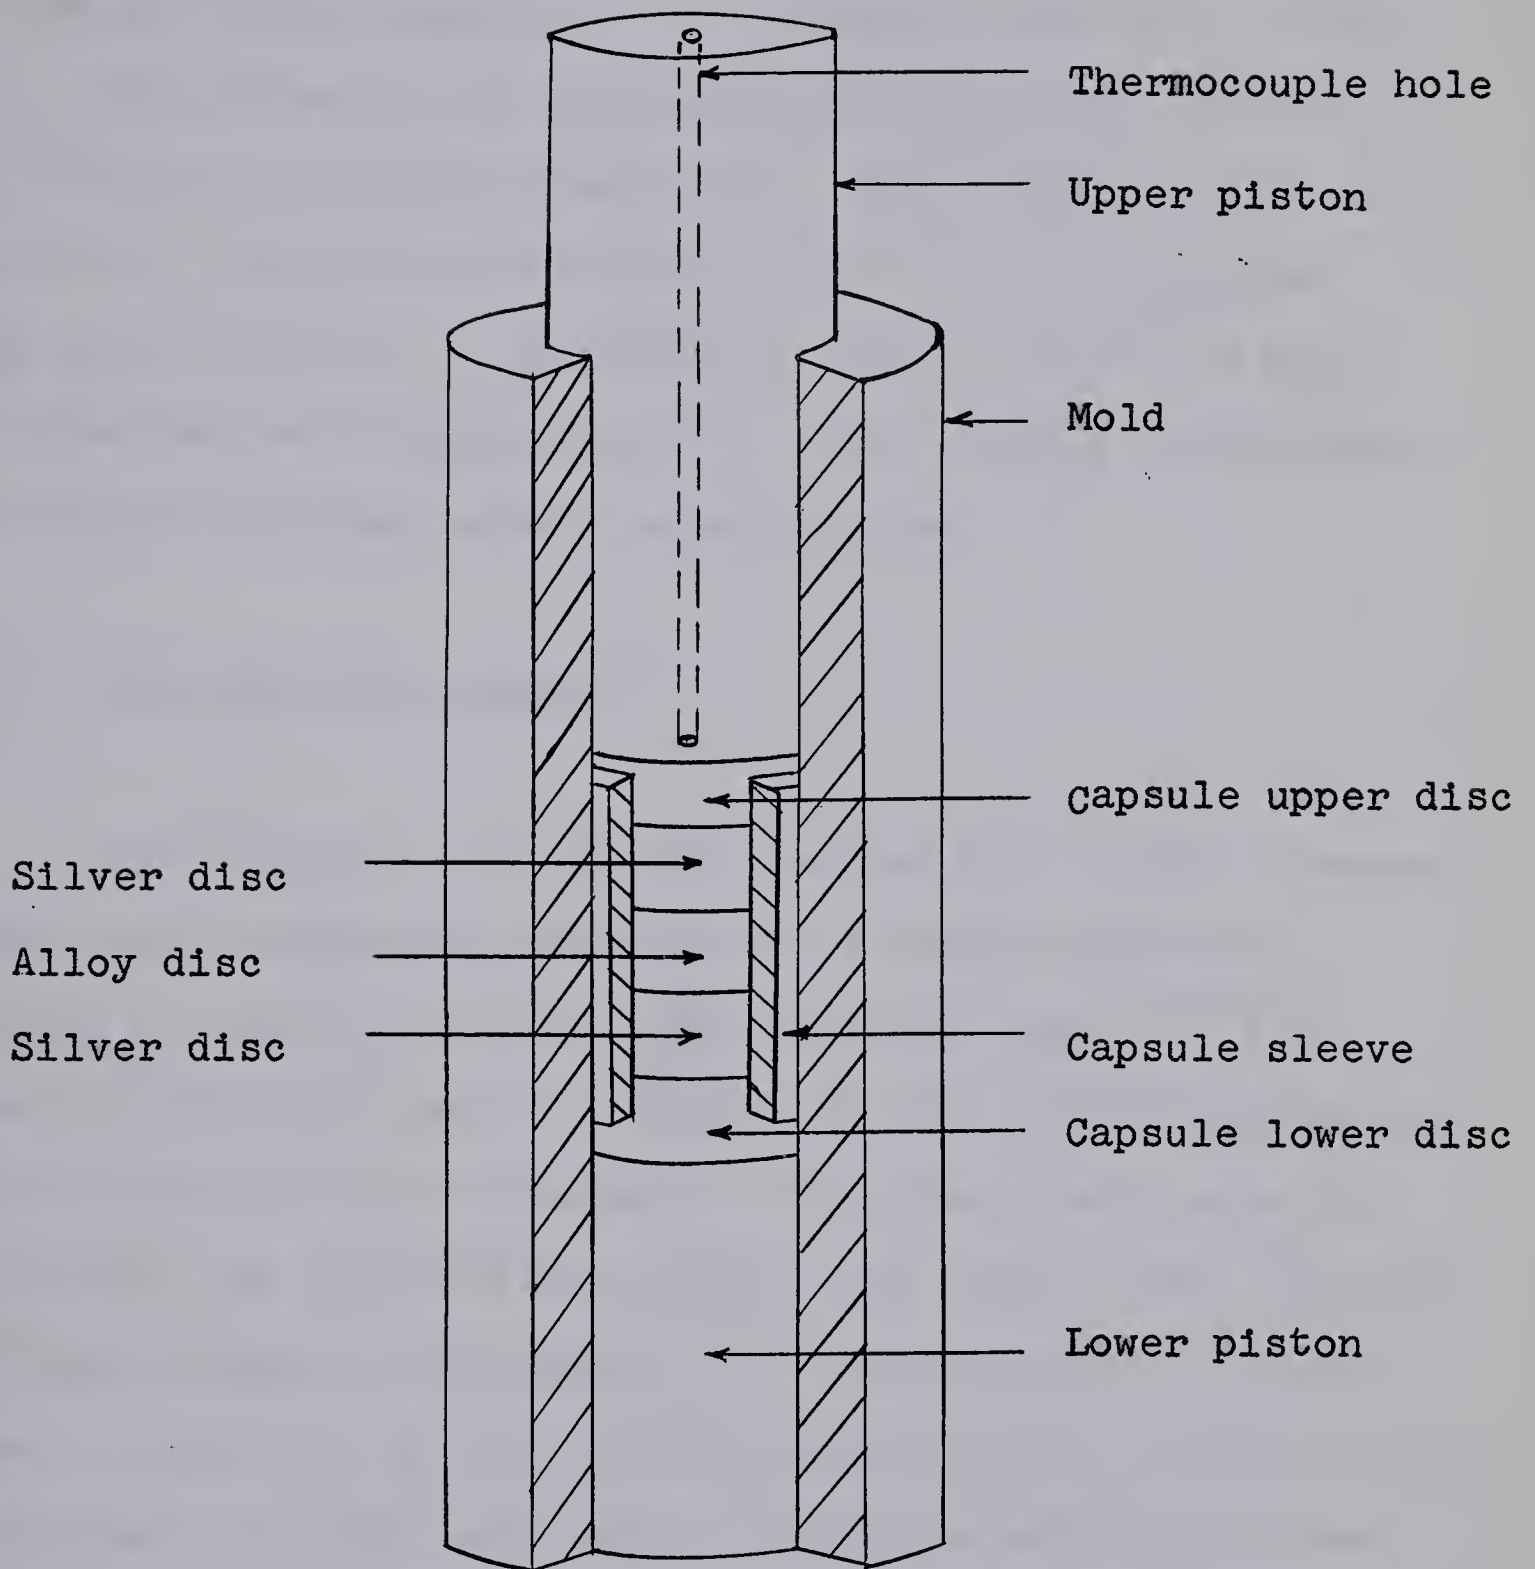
Welding assembly for silver-copper diffusion couples.
